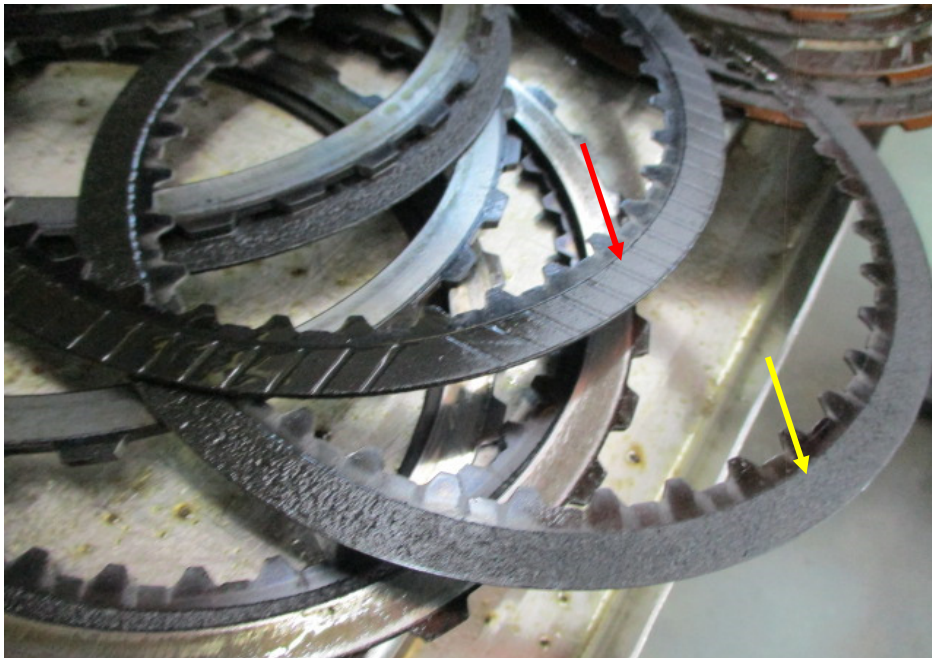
shows the Motor Car's transmission assembly dismantled with all mechanical parts inside the transmission housing dismantled and separated. This was on 24 August 2020. Examination of these mechanical parts revealed signs that the transmission of the Motor Car had overheated.
